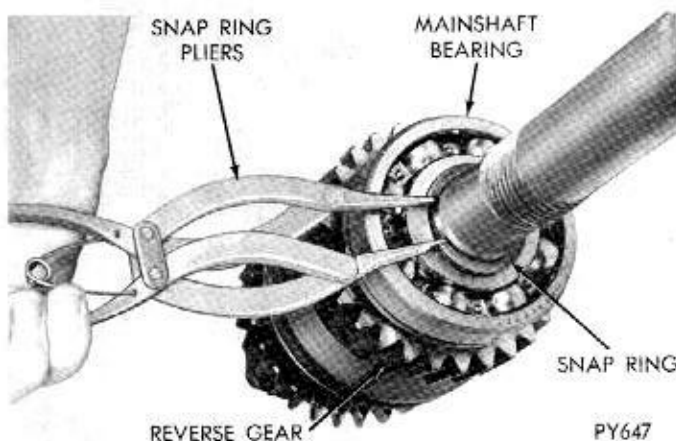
Snap Ring—Mainshaft Bearing to Shaft—Removal or Installation
